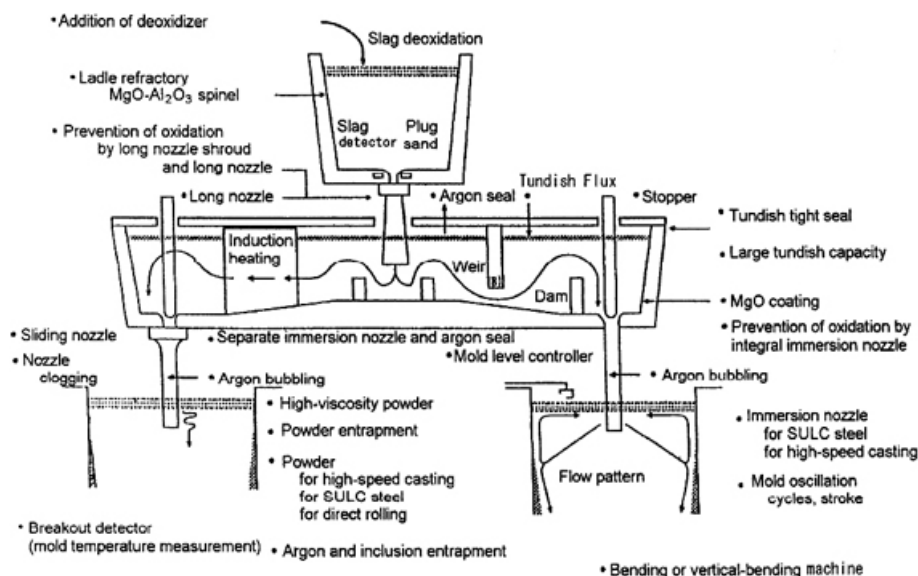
Continuous casting system (ladle, tundish and moulds) with all devices and precautions for casting clean steel (SULC = Super Ultra Low Carbon steel) [10].
